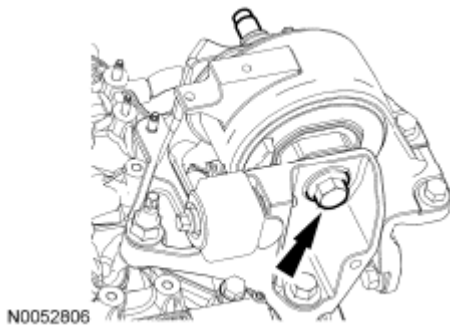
Locating Transaxle Support Insulator Through Bolt & Nut
